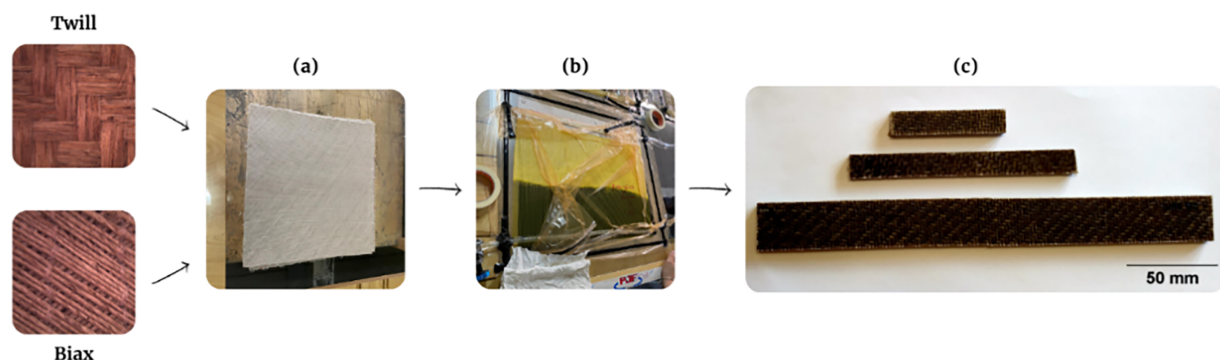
Composite specimen manufacturing process: (a) Lay-up of the fibres; (b) VARI processing; (c) Final composites with dimensions for mechanical testing.
